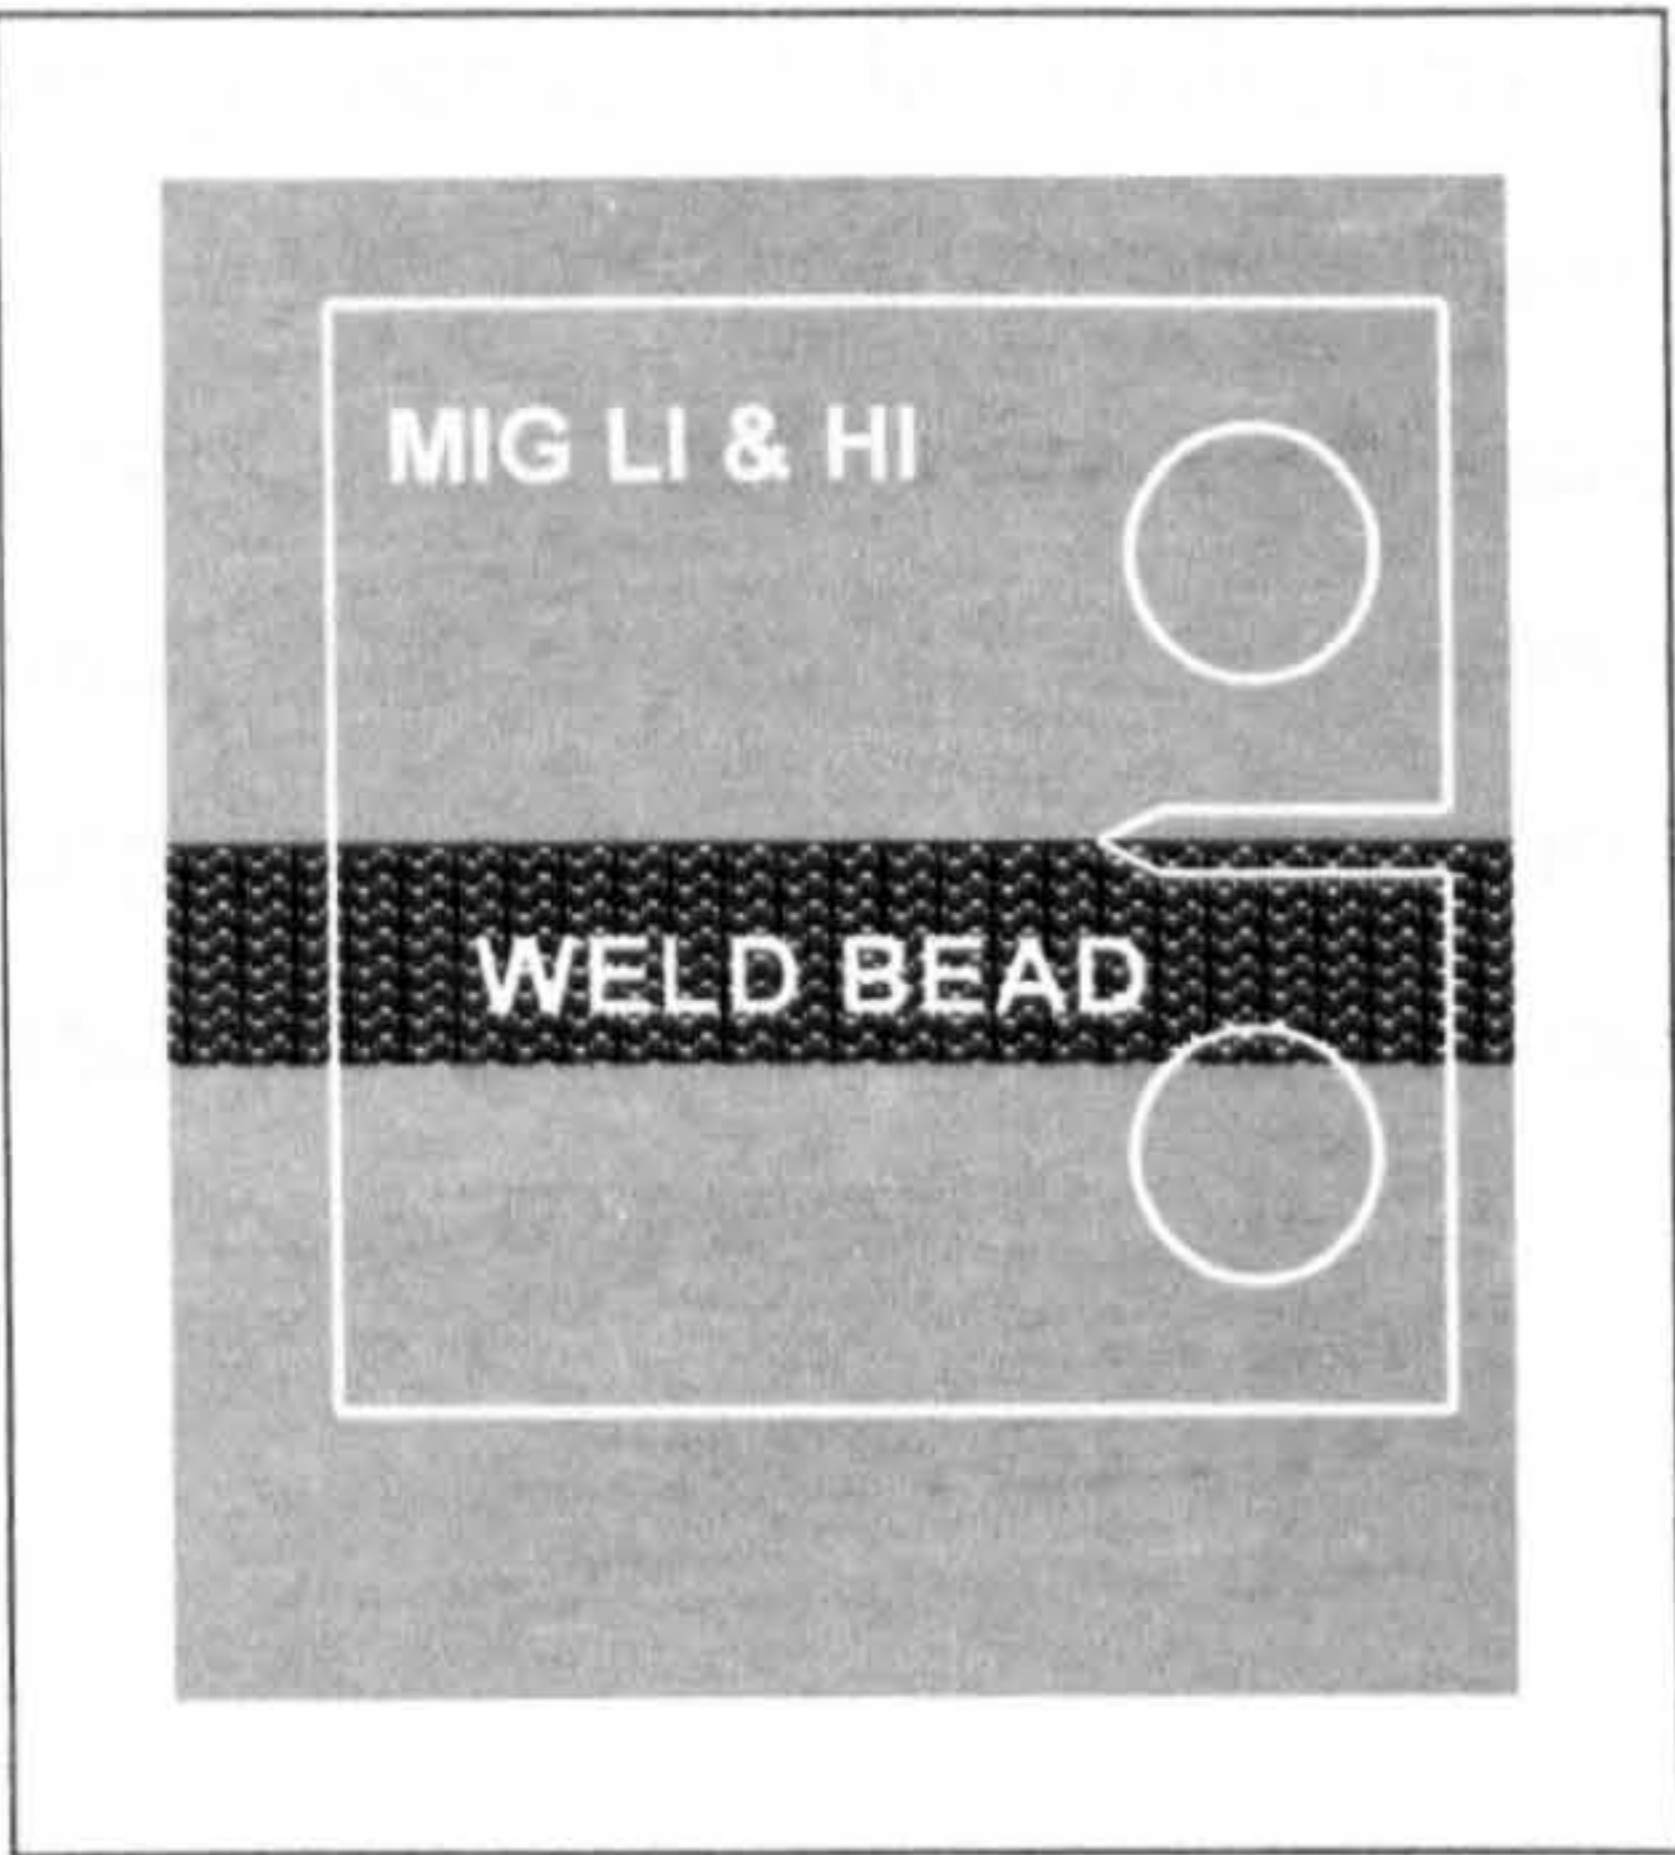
Position of CT specimens in relation to the MIG welds.
